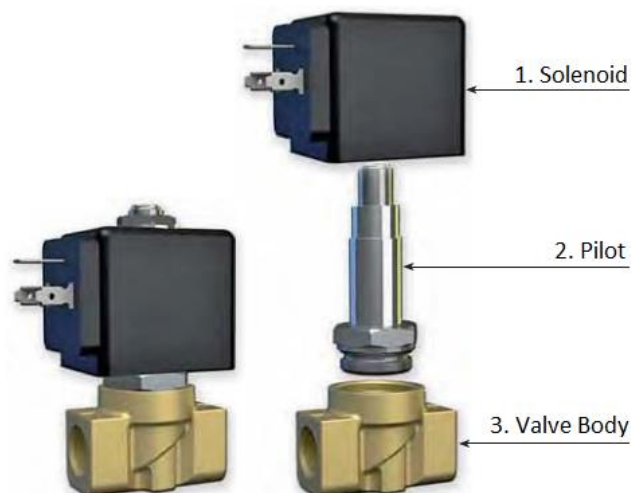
EXPLODED VIEW OF A SOLENOID - ADAPTED FROM [39]
